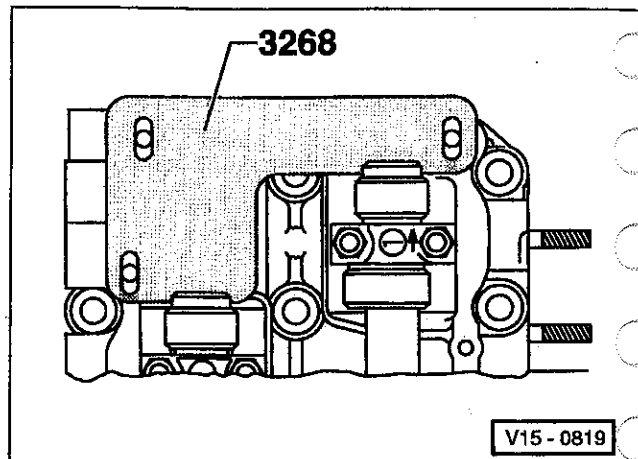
VW special tool no. 3268 aligns camshafts at TDC. Tool engages slots in rear of camshafts.
